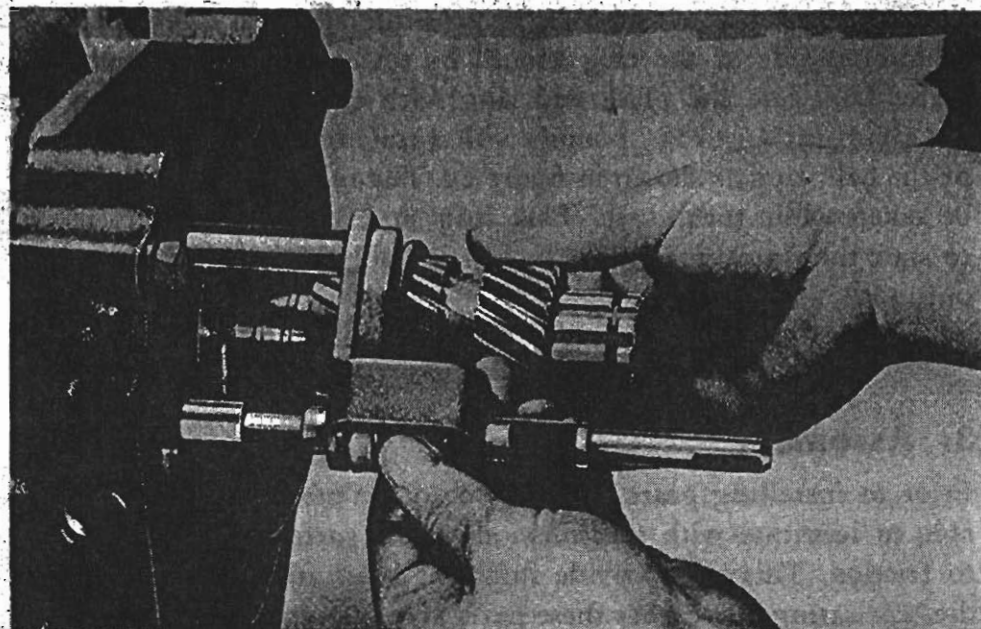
Remove the Large Snap Ring from the Ring Gear.
